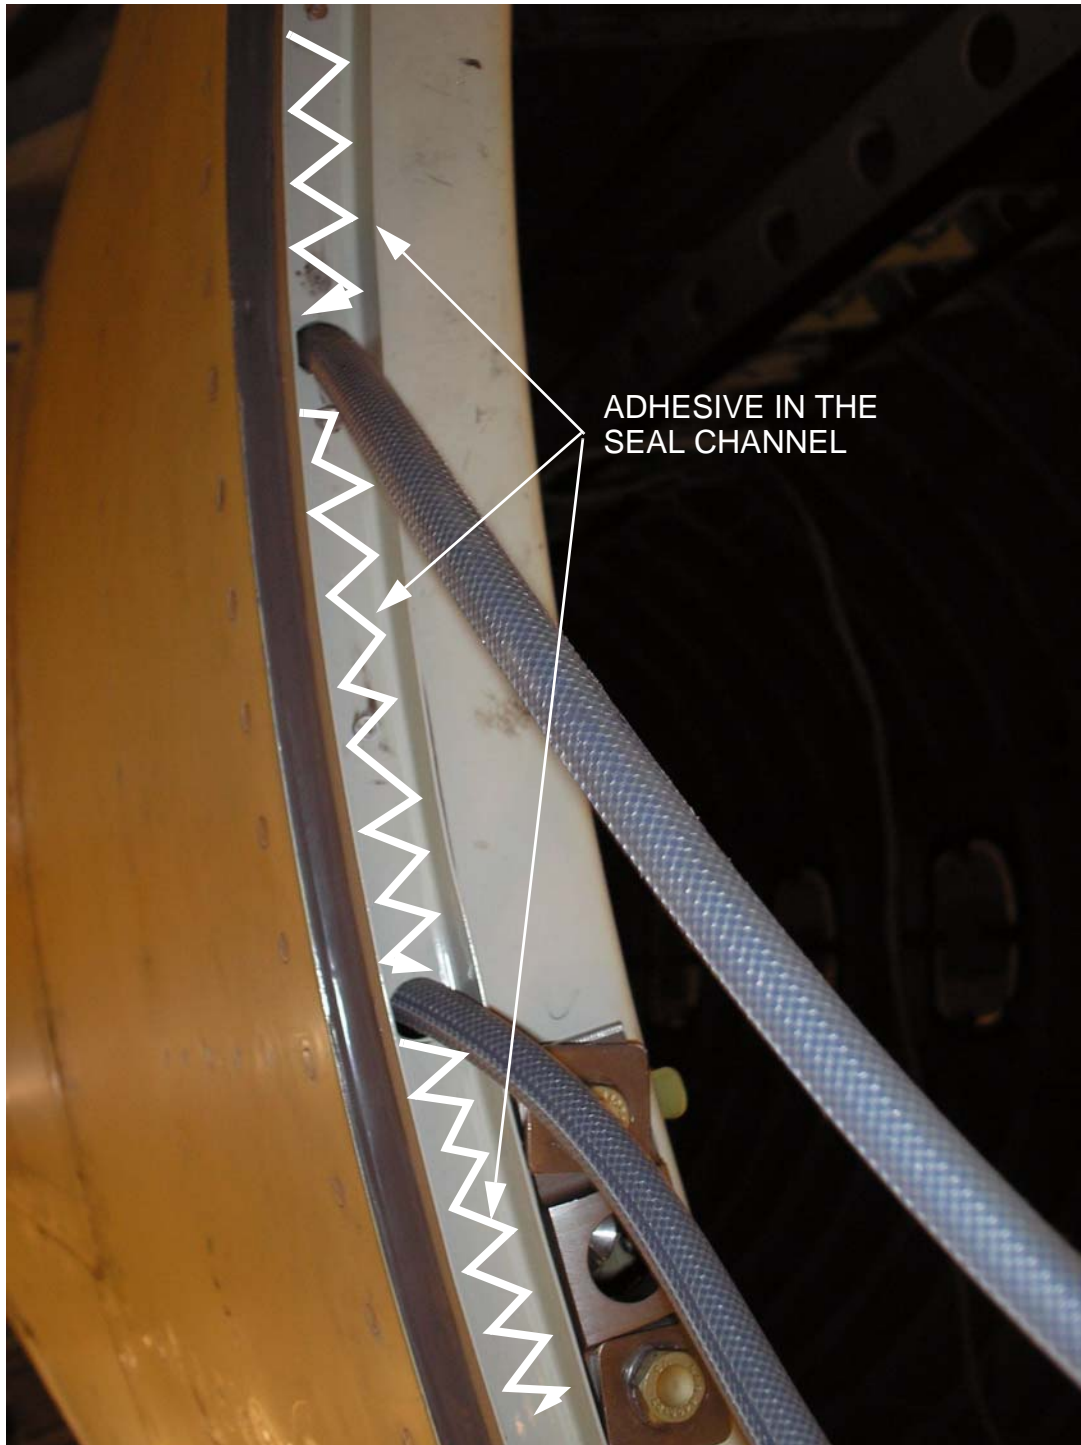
Upper Cabin Door Seal - Installation (Sheet 4 of 6)
